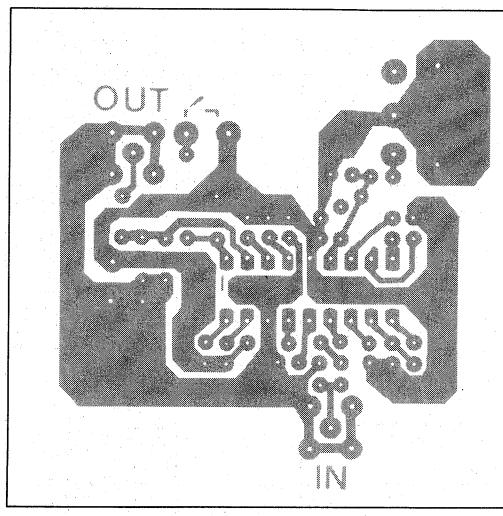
Track side of printed-circuit board used for the circuit of Fig. 4.
